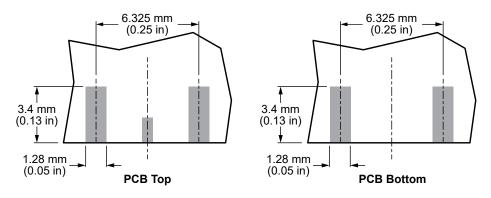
Recommended PCB Dimensions for the CON292003-2-G
